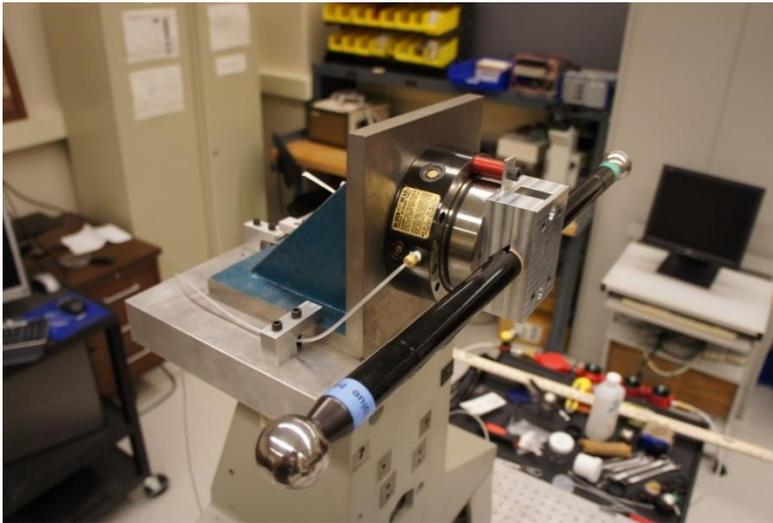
Setup of rotating ball bar using an air-bearing spindle
